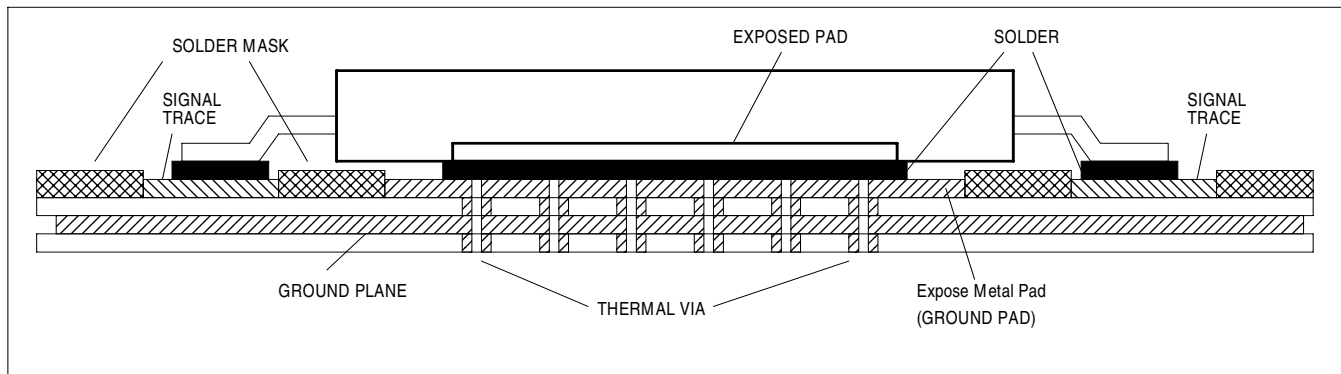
P.C. BOARD FOR EXPOSED PAD THERMAL RELEASE PATH EXAMPLE
